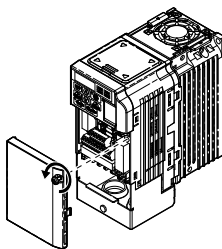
Remove the Front Cover on an IP20/NEMA Type 1 Drive
